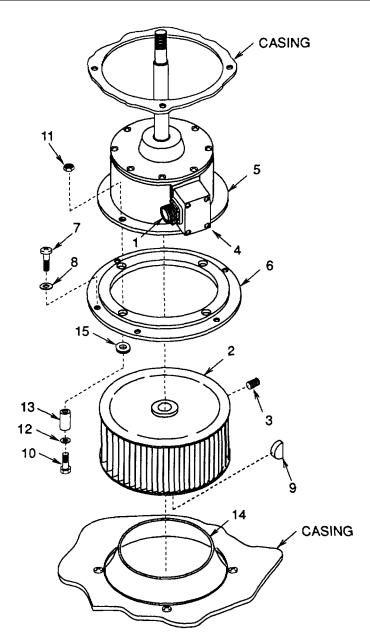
Evaporator and Condenser Fan Motor and Condenser Fan
